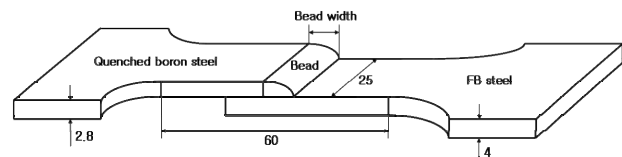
Welded specimen for tensile and fatigue tests (unit: mm).
